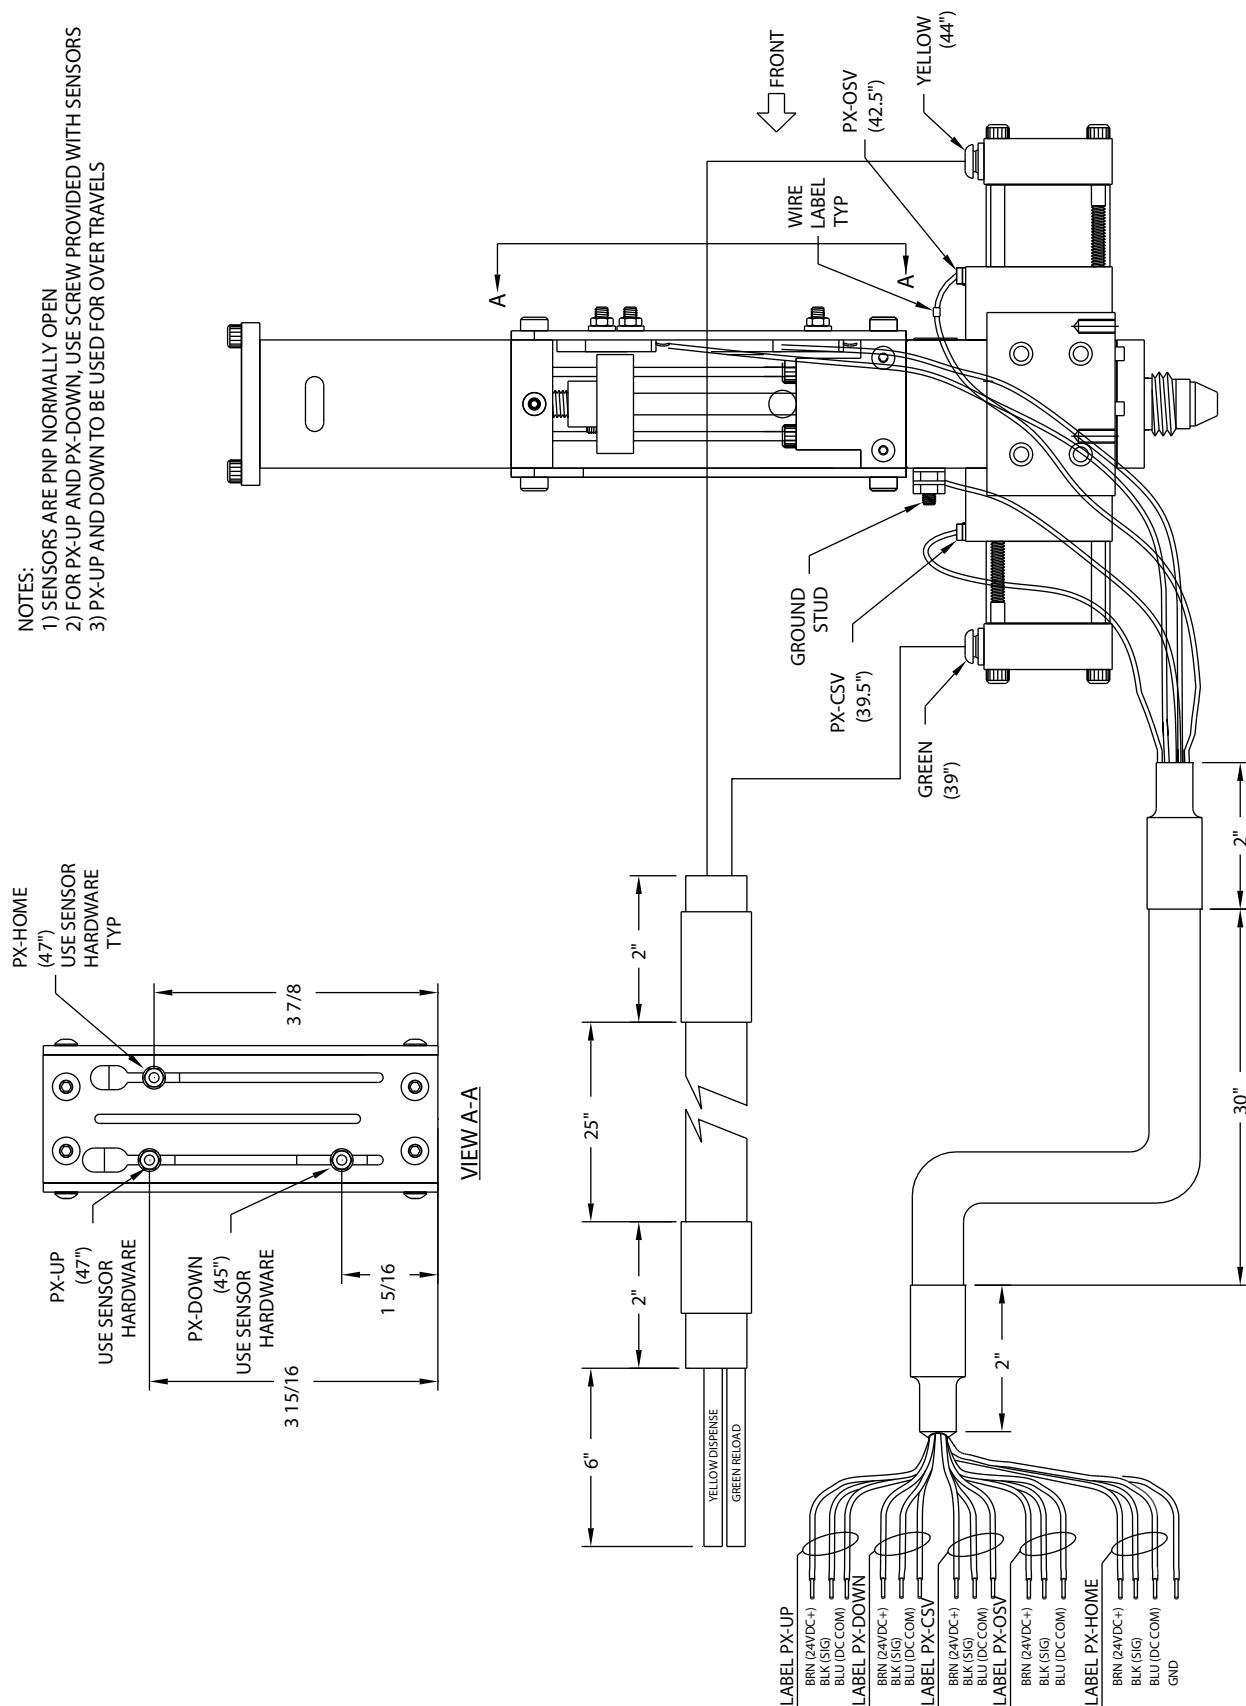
Motor Driven PD44 Metering Valve Electrical Requirements
